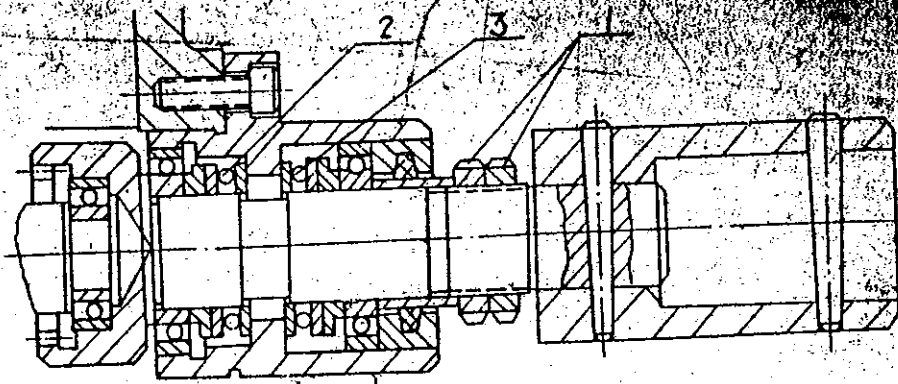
Adjusting diagram of thrust bearings on leadscrew
